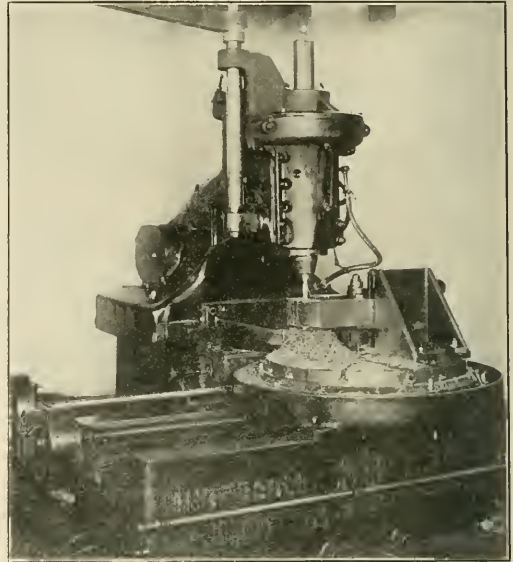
Finishing Inside Surfaces of a Main Rod Strap
